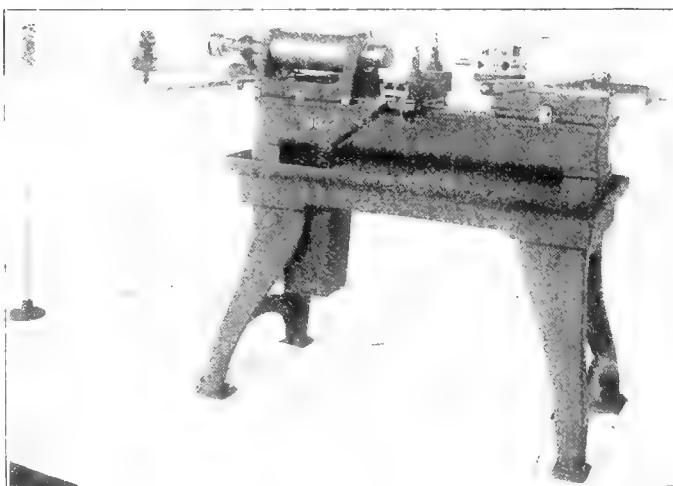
NO. 2 HARD RUBBER LATHE.
